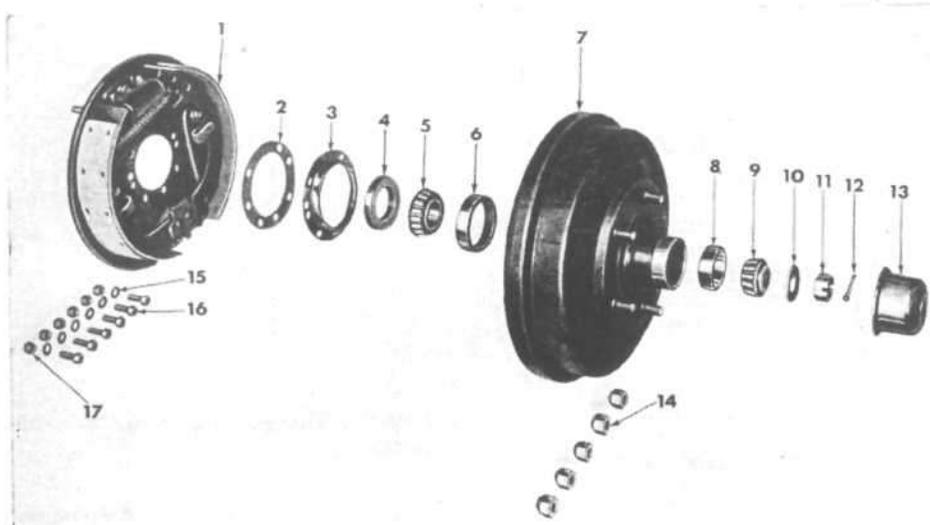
FRONT WHEEL ATTACHING PARTS — 2-WHEEL-DRIVE VEHICLES
